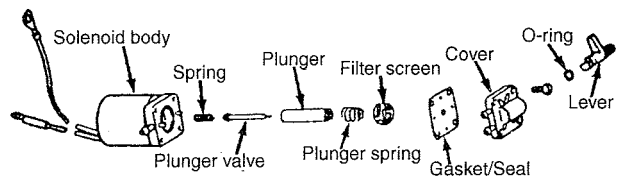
Exploded view of an electric fuel primer assembly used on V4/V6/V8 loop charged motors
